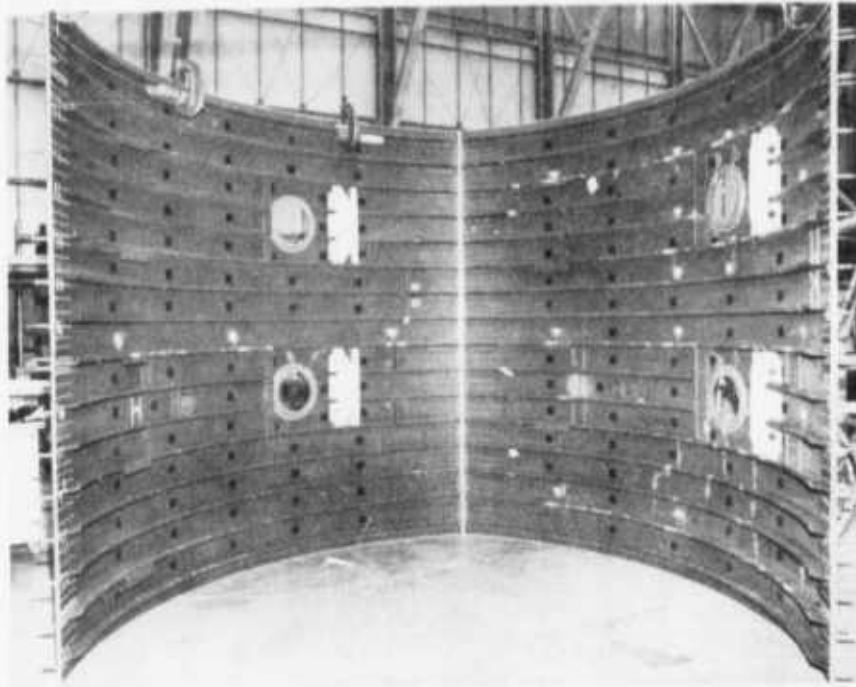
INSIDE VIEW OF PARTIALLY ASSEMBLED TEST ARTICLE
